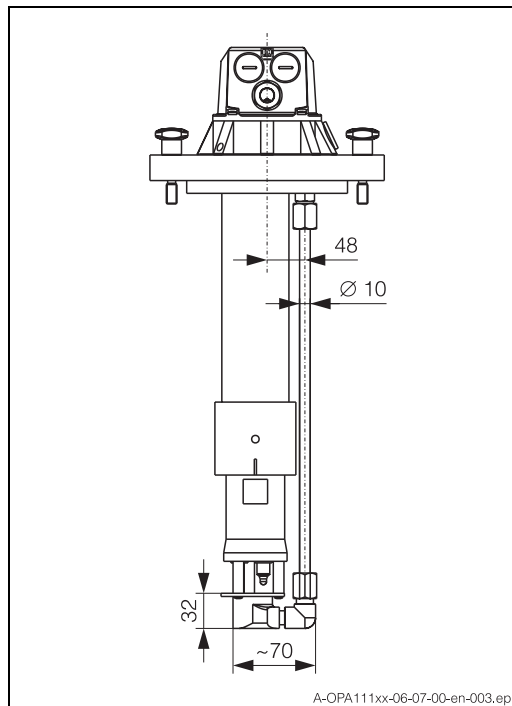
Dimensions of OPA 111 with spray cleaning head
